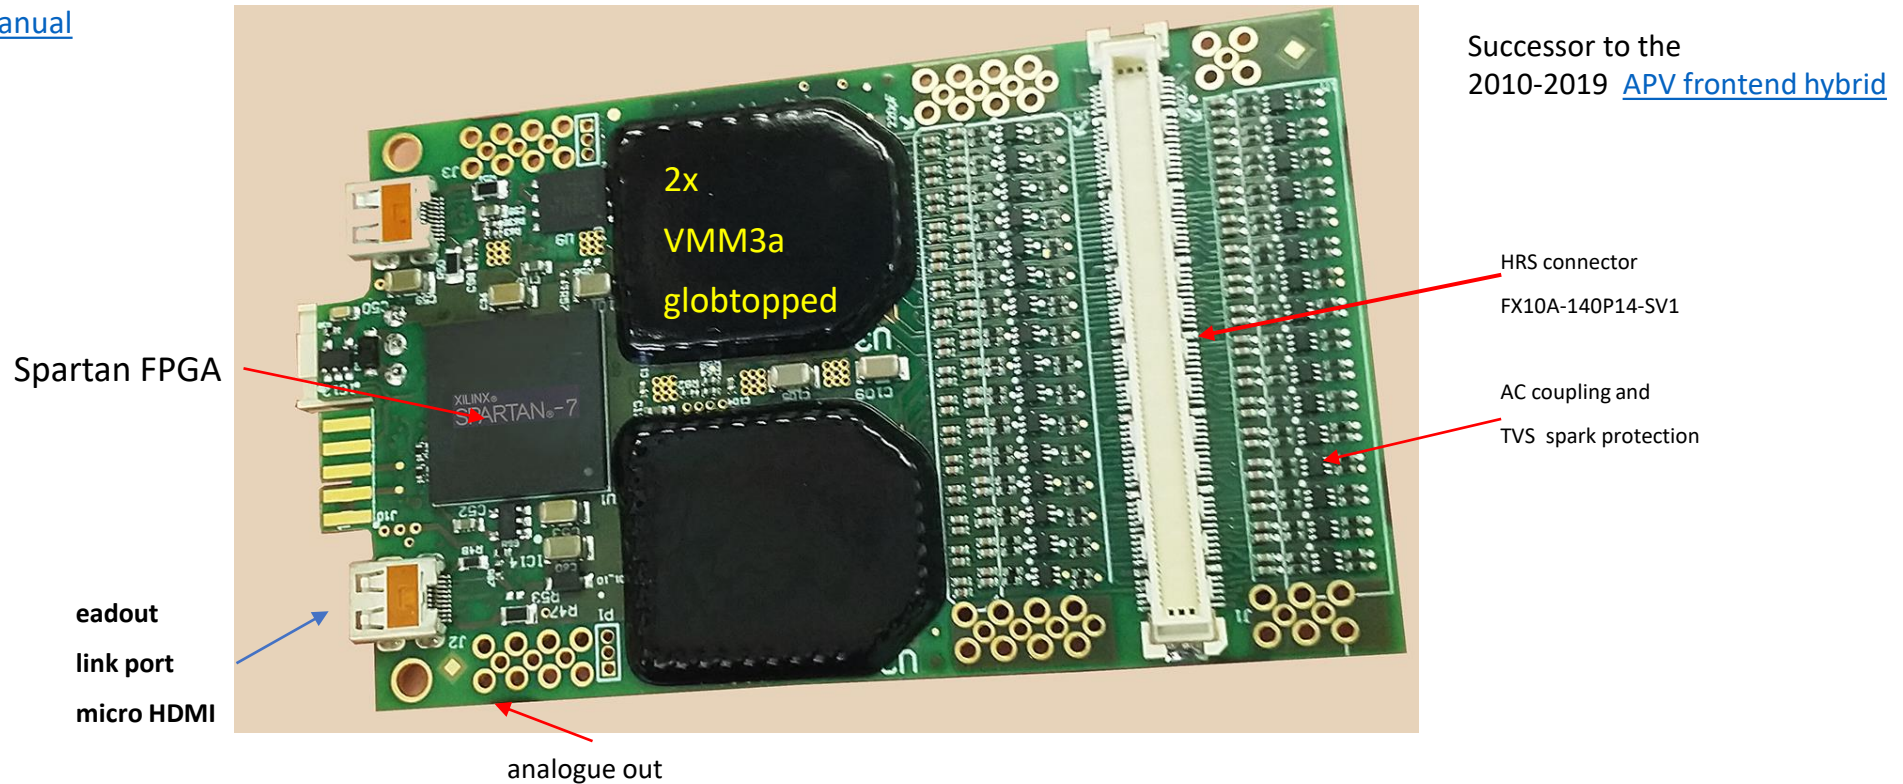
Photo VMM hybrid V5 (2022+) bottom side (cooler plate removed)
